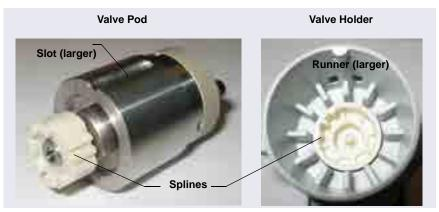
High-Pressure Valve Pod and Pod Holder
